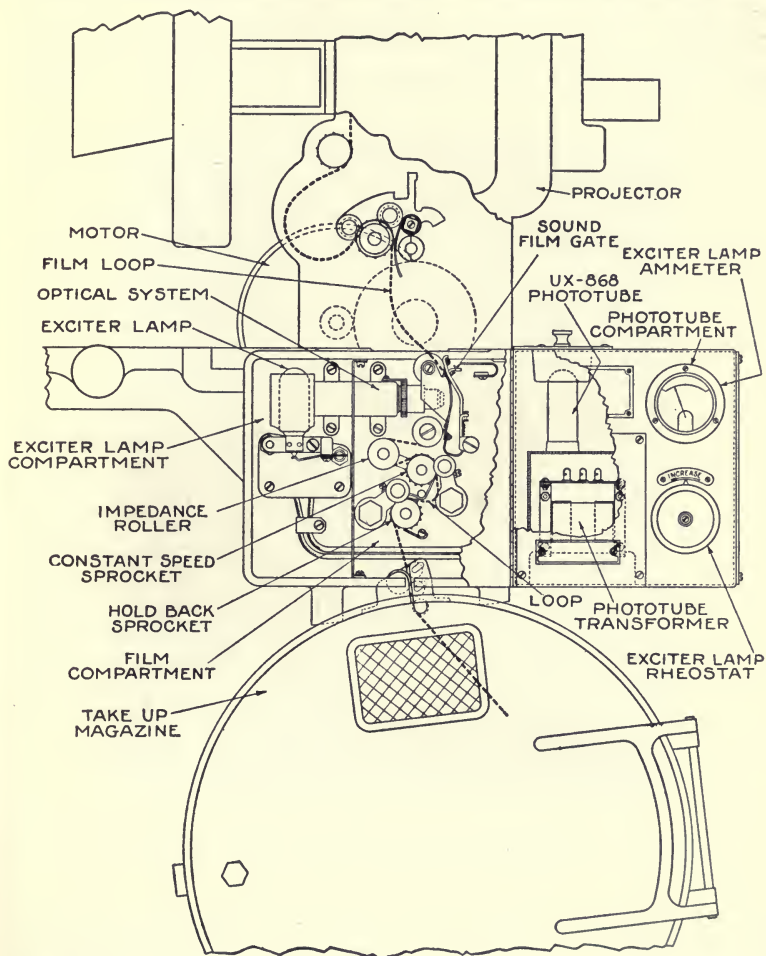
View of operating side of sound attachment PS-16 showing the path of film.
